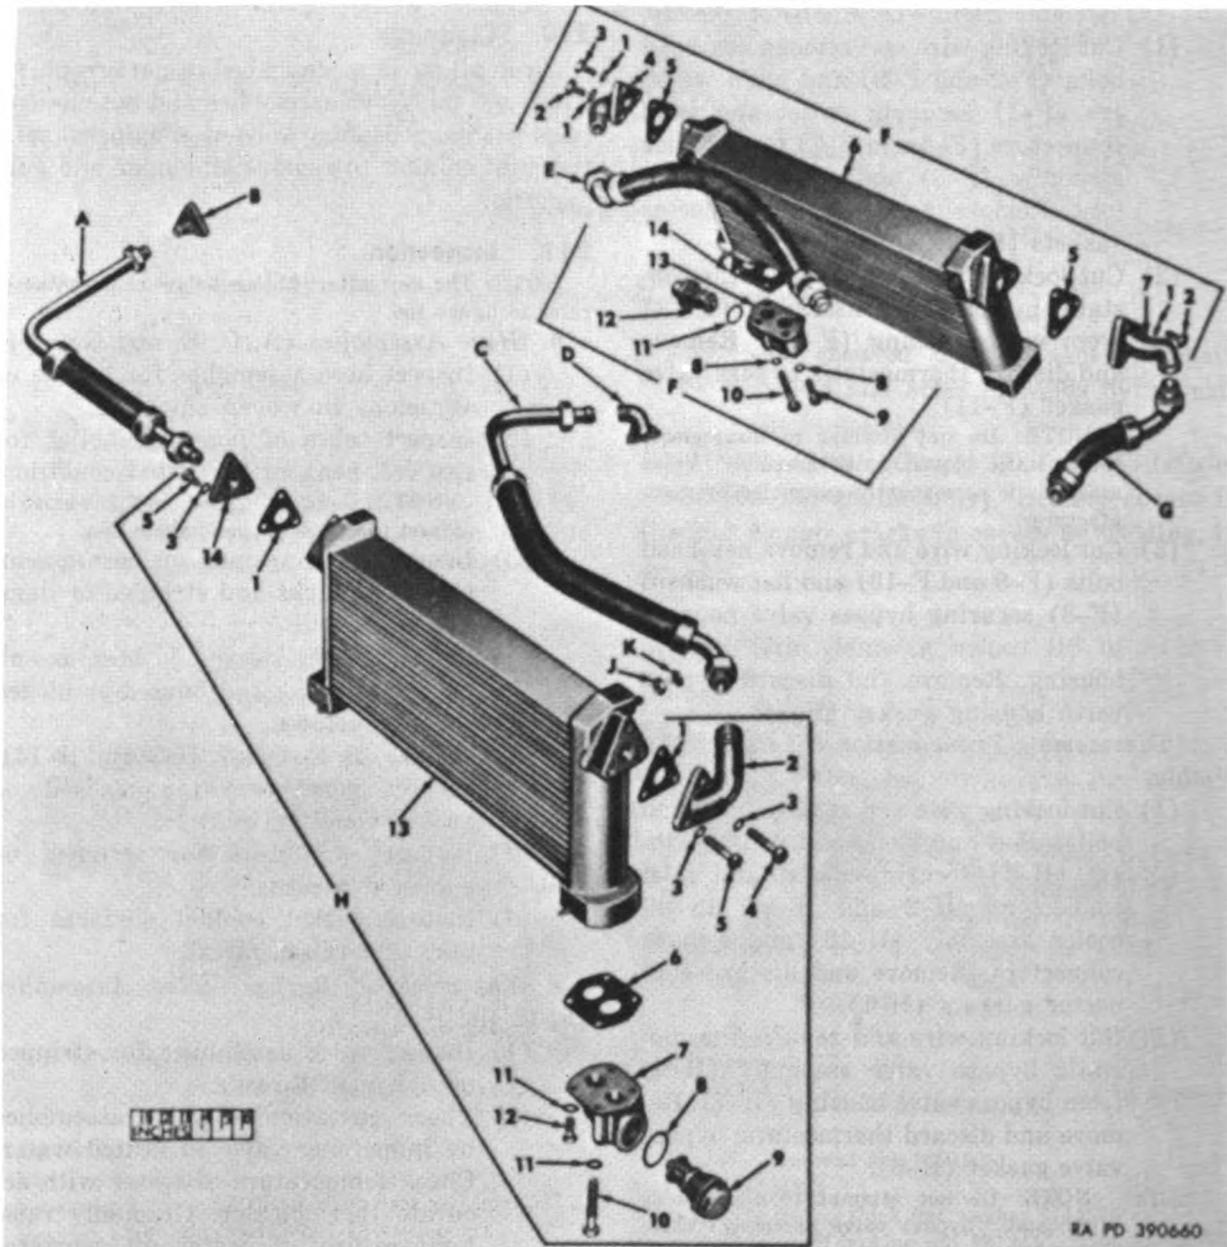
Oil cooler assemblies, connectors, and hose assemblies—exploded view.
